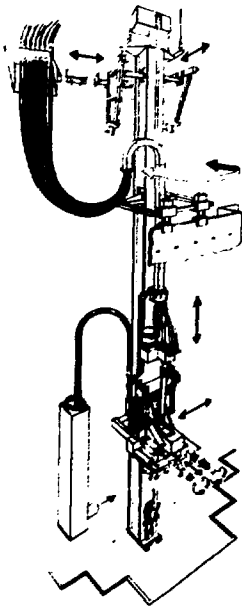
Manipulator for inspection and repair of core baffle former bolts
